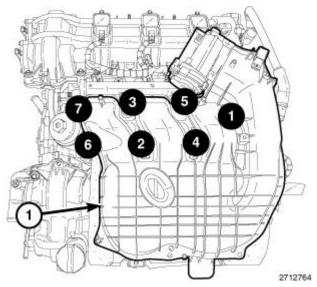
Upper Intake Manifold Bolt Tightening Sequence Courtesy of CHRYSLER GROUP, LLC
